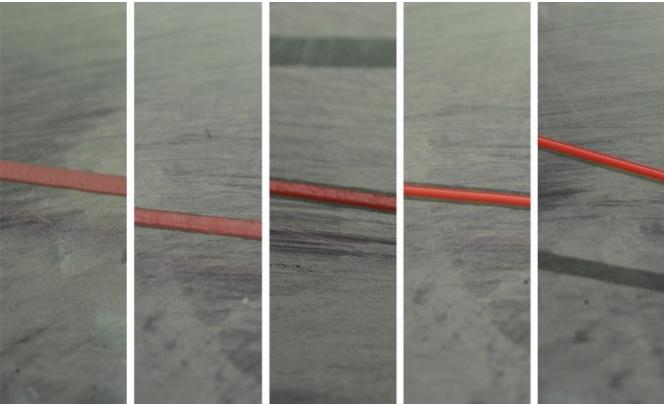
First print layer examples.* (*Image Courtesy of LulzBot*)
